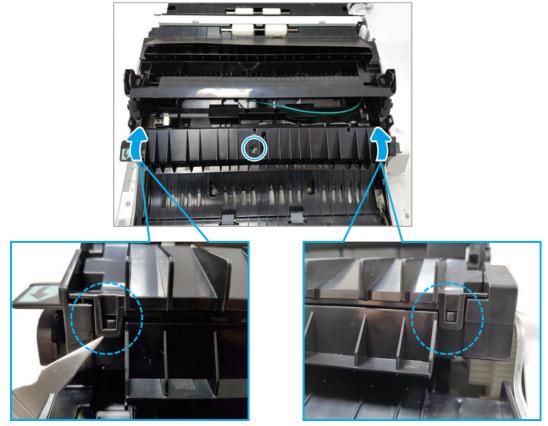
Remove screw and turn over guide-transfer roller upper
